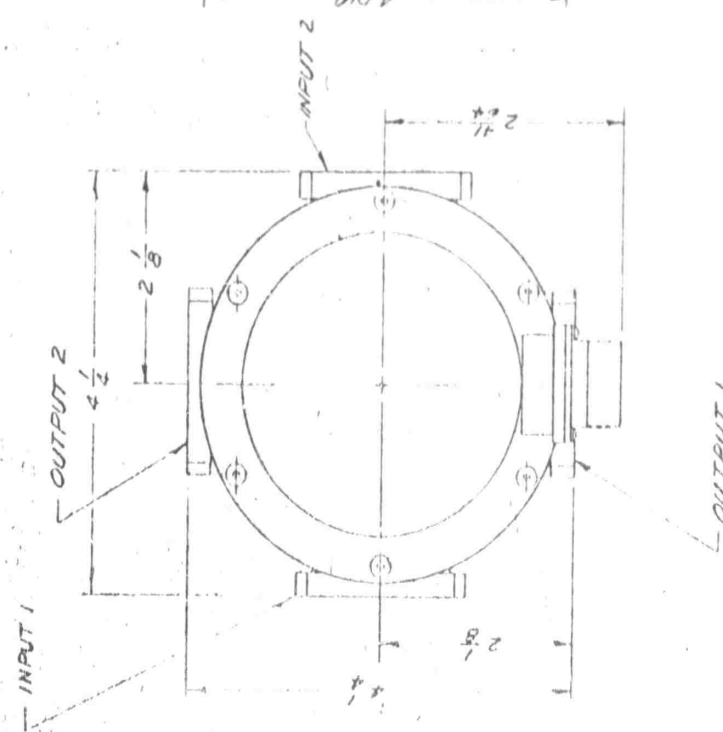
PRESSURIZING TEFLON CAP AND MOUNT ASSEMBLY
